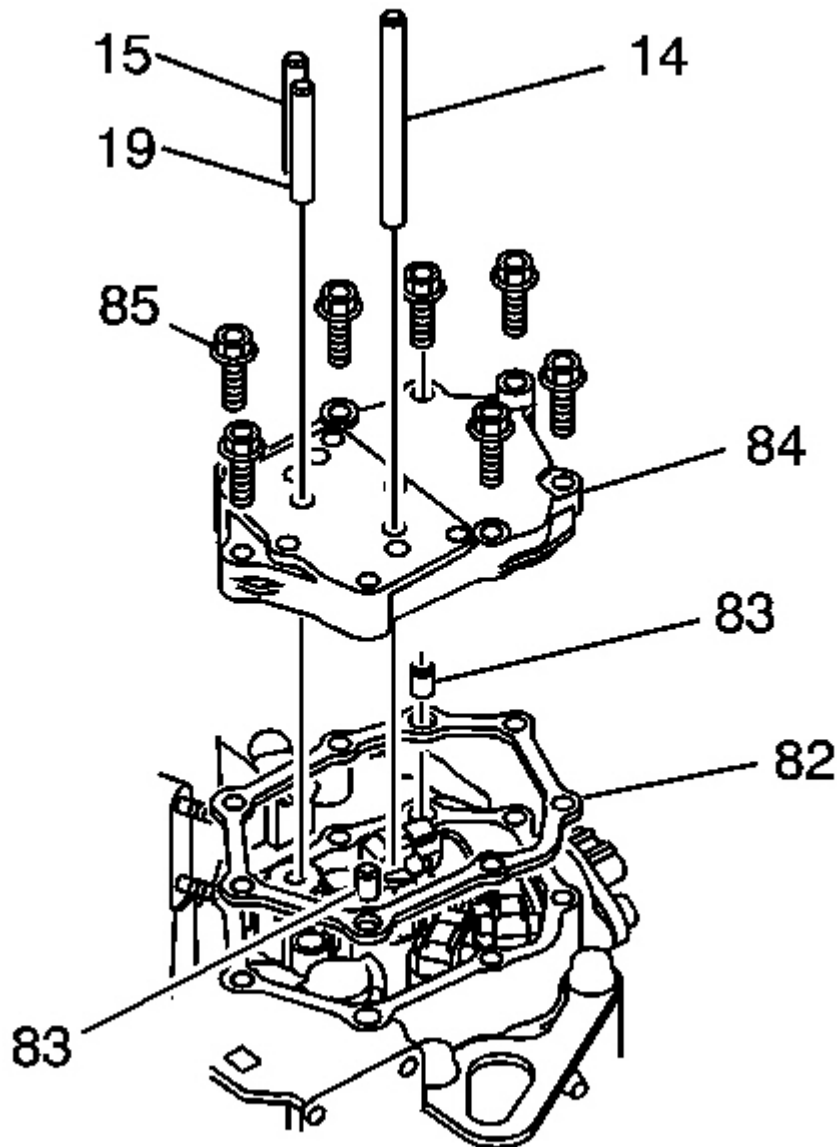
Clutch Pressure Control Fluid Pipes, Bolts, Manifold Gasket & Pins
